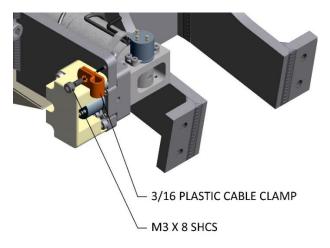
Secure Cable Clamp with a M3 X 8 SHCS – CAD Model
